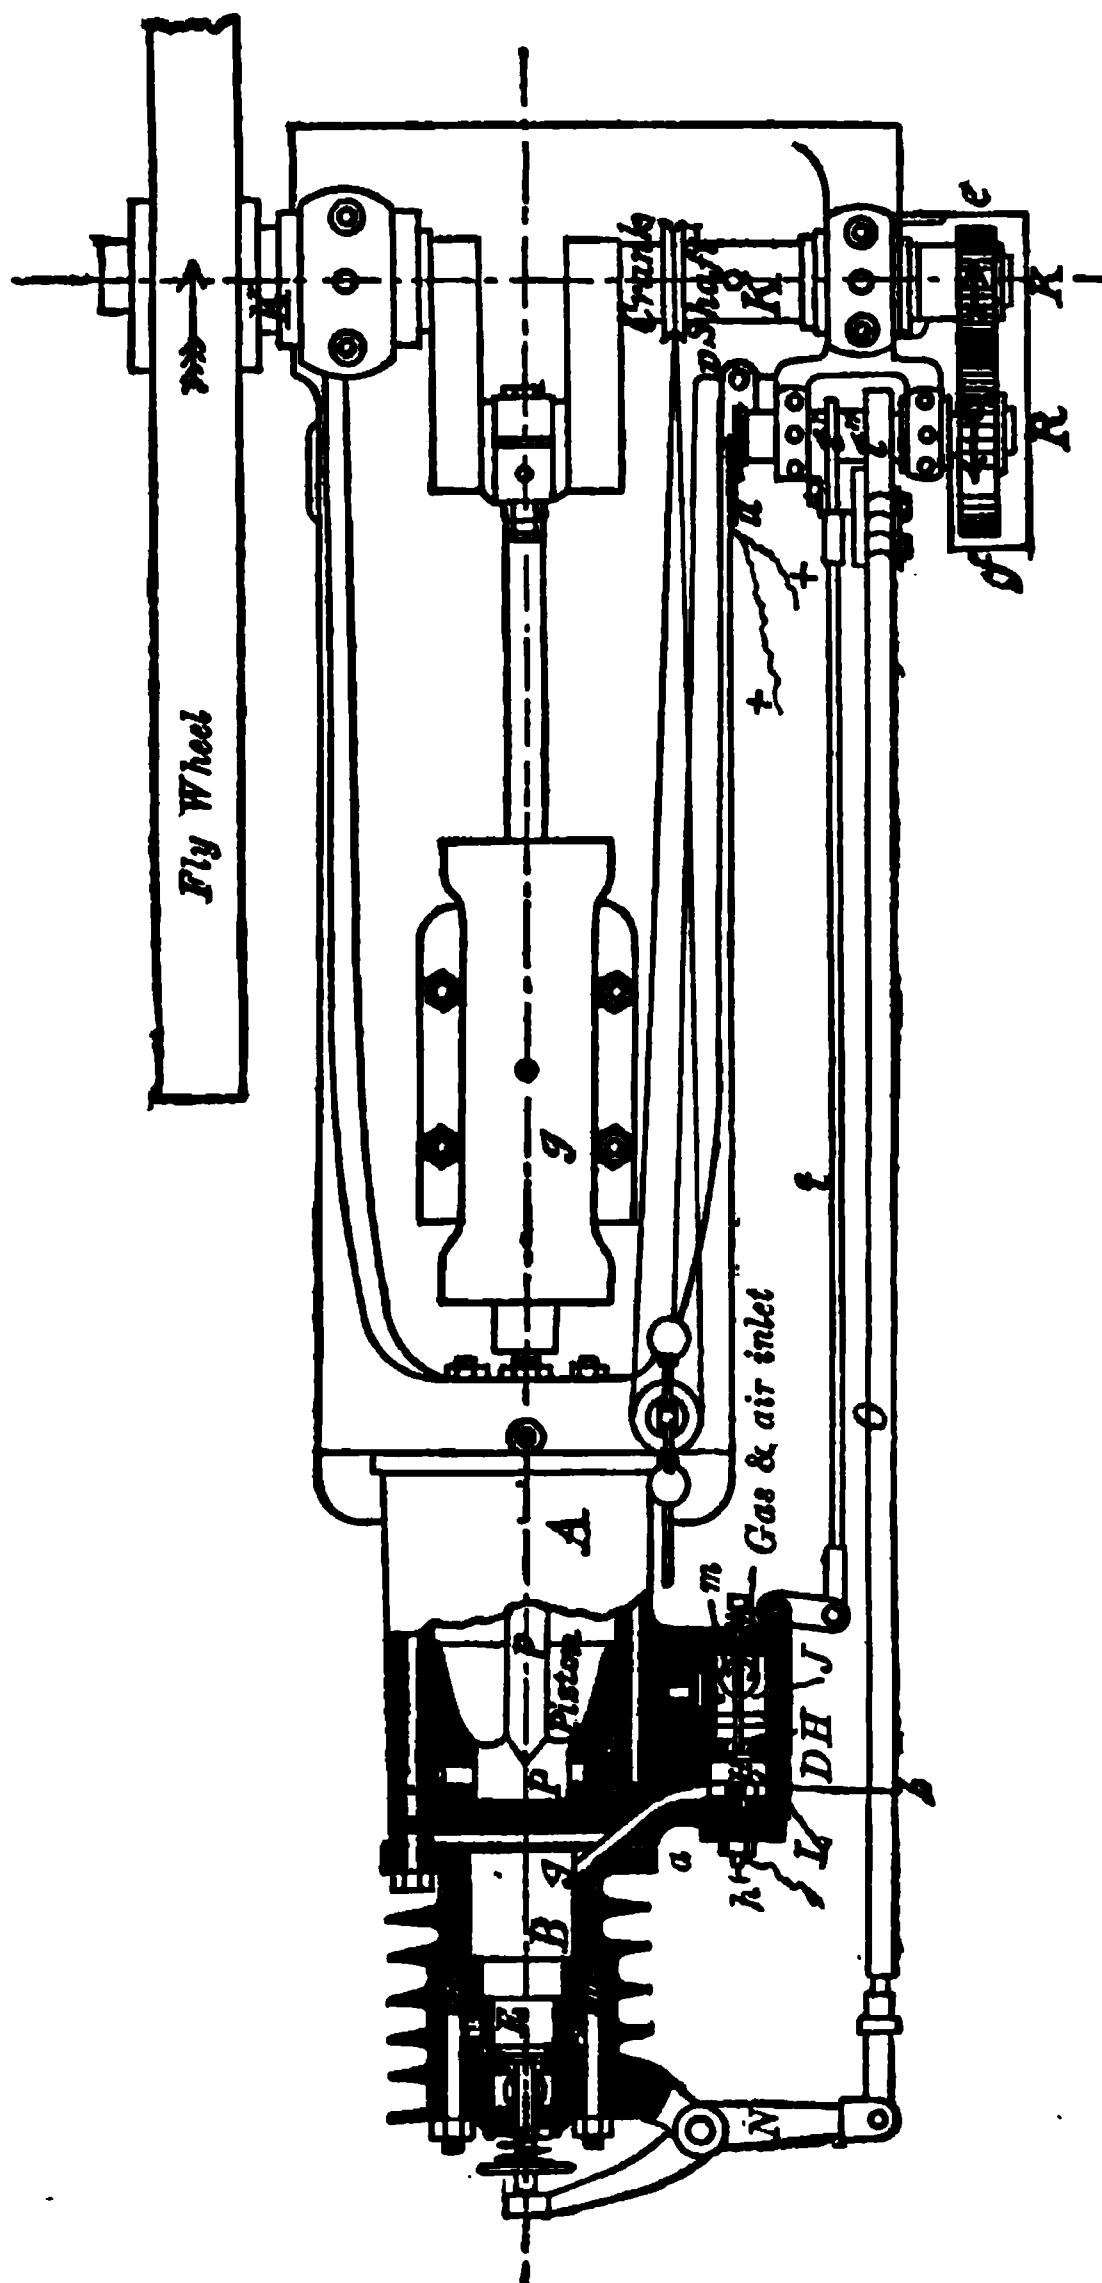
Second Lenoir Gas Engine—Sectional Plan. 1853.
